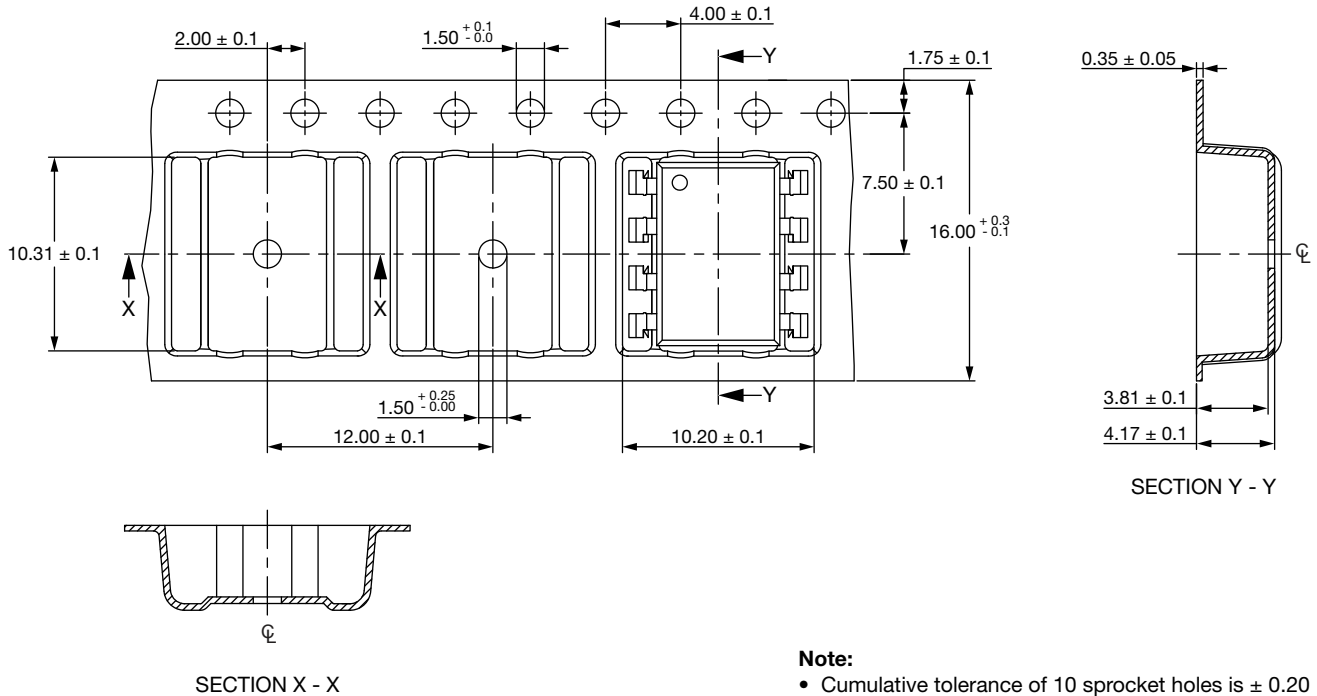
Tape and Reel Packing for SMD-8, Option 9 (1000 pieces on reel)
